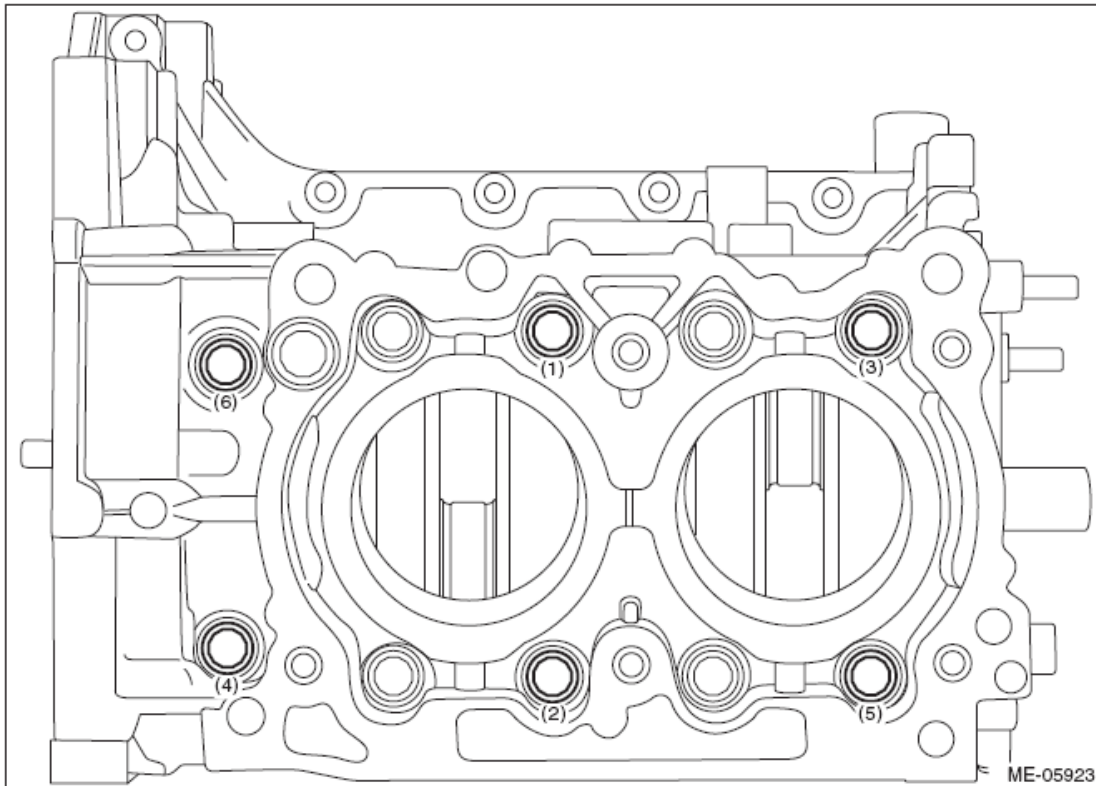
Identifying Cylinder Block Mounting Bolts Tightening Sequence
